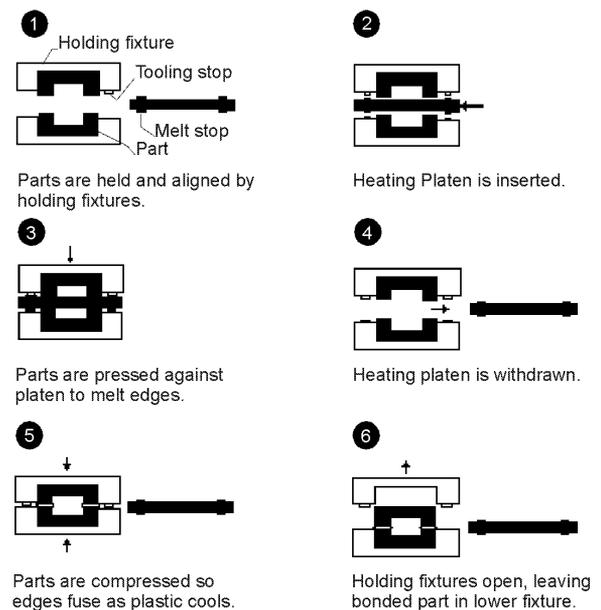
The hot tool welding process, showing displacement stops used in welding by distance. In step 1, parts are aligned in holding fixtures; tooling and melt stops are set at specified distances on the holding fixture and heating platen, respectively. The platen is inserted between the parts in step 2, and parts are pressed against it in step 3. Step 3 includes phases I and II of Figure 1.2. Molten material melts and flows out of the joint interface, decreasing part length until melt stops meet tooling stops. Melt thickness then increases until the heating platen is removed in step 4, the changeover phase (phase III in Figure 1.1). Parts are pressed together in step 5 (phase IV), forming a weld as the plastic cools; tooling stops inhibit molten flow. The welded part is removed in step 6.
